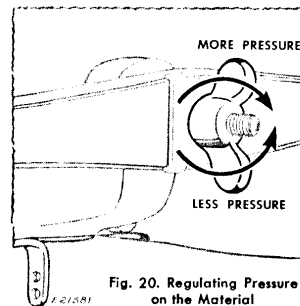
Regulating Pressure on the Material (View on Top of Machine)
